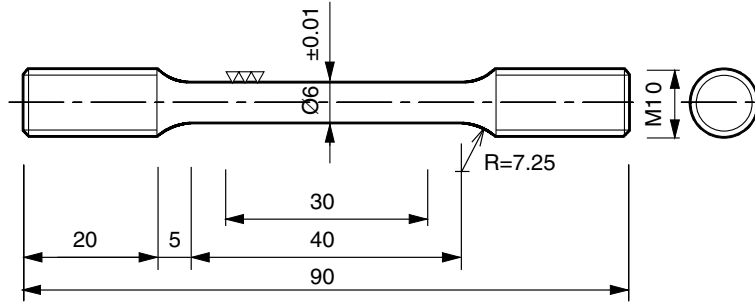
Uniaxial tensile test specimen (all measures are in mm).
